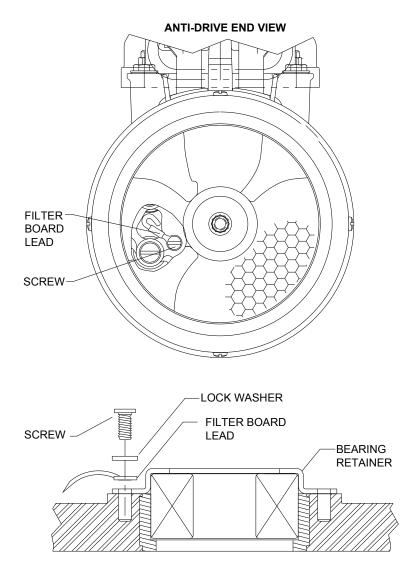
Attaching the Bearing Retainer and Filter Board Leads
